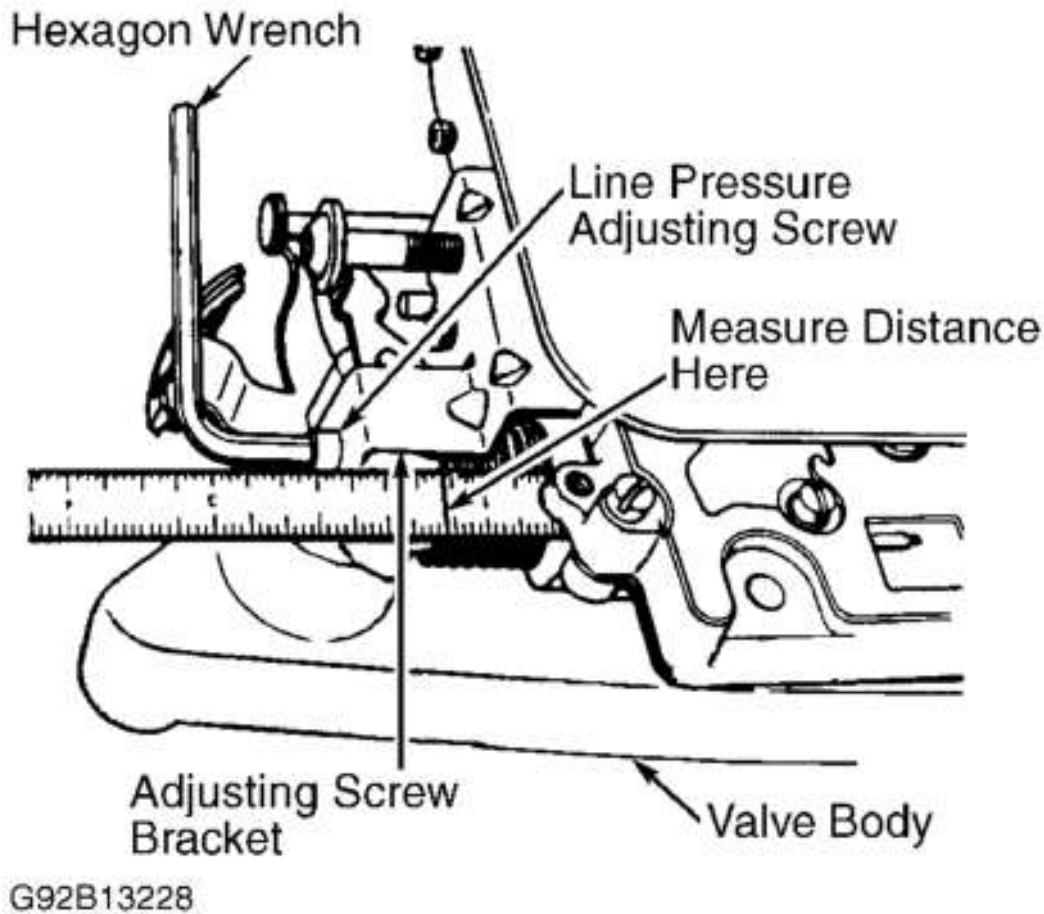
Identifying Adjusting Screw Bracket & Adjusting Line Pressure
